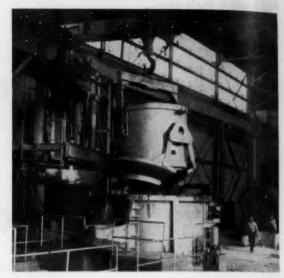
An auxiliary crane hook is used to pull the cable, once the charger is located over the furnace, which opens the clam shell bottom.
